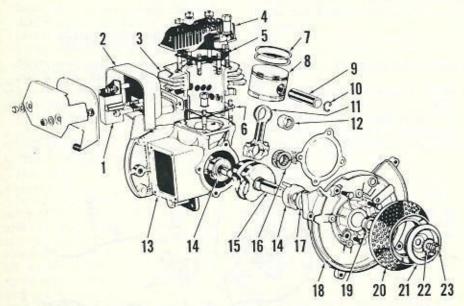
Exploded view of model 275 engine. Other models except models shown in Figs. SK17 or SK18 are similar.
